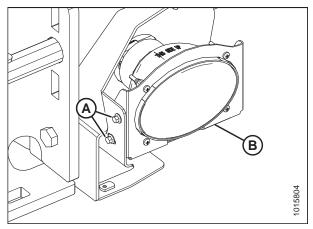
Right Side Headlight Shown – Left Side Similar
